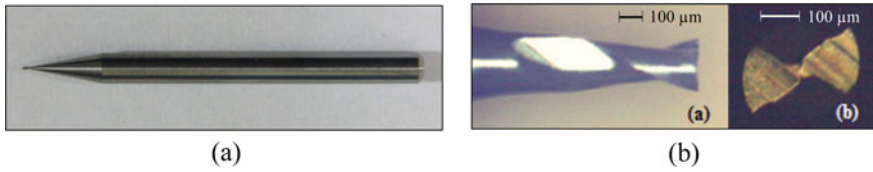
A Micro-milling cutting tool, B Enlarged (a) side view and (b) Top view of tool tip of micro-end mill [14]
